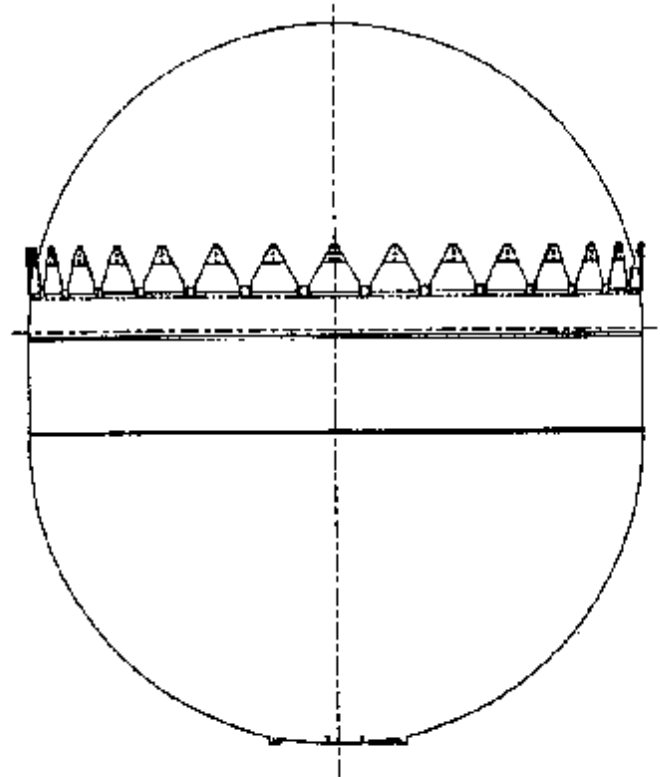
OUTLINE OF I-VIIA TANK ASSEMBLY
